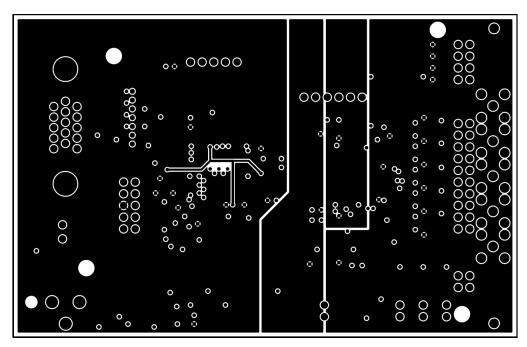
GPX2-EVA BOARD Layout: Bottom layer
